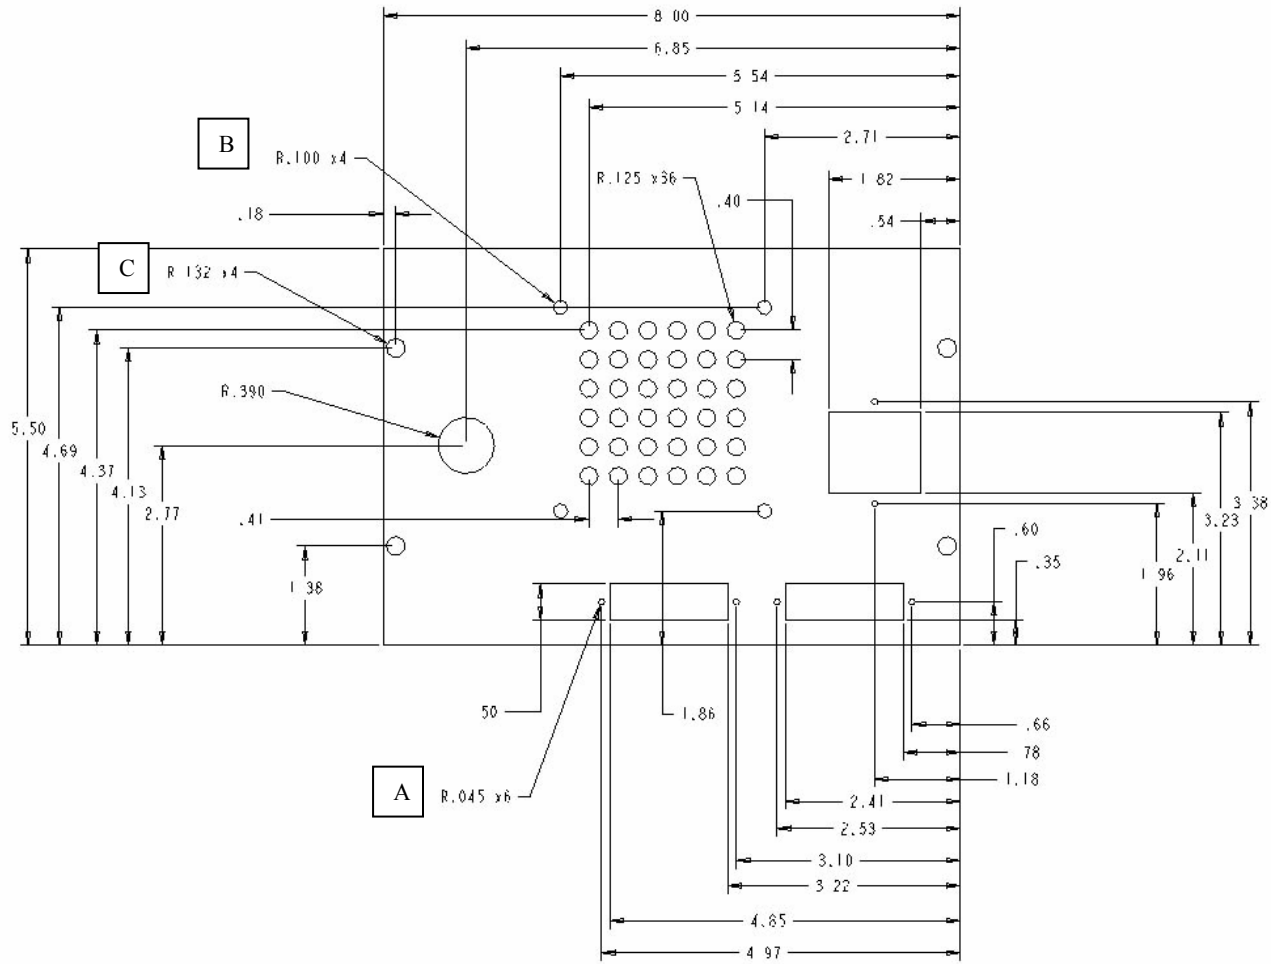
Dimensioned Drawing of the plex-glass plug piece
